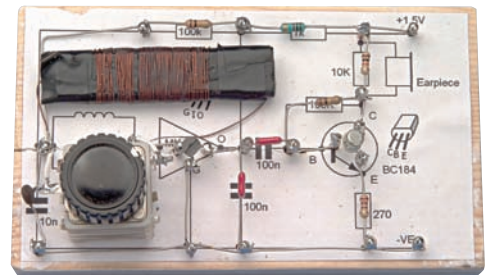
Using the board, and paper drawing technique. The solder terminals are copper plated hardboard pins (available for B&Q and other DIY shops (see text).
